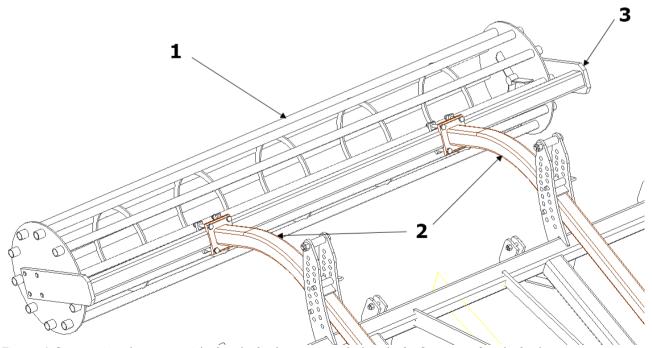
Connecting the arms with the shaft clamp: 1 - tubular shaft, 2 - arms, 3 - shaft clamp.
